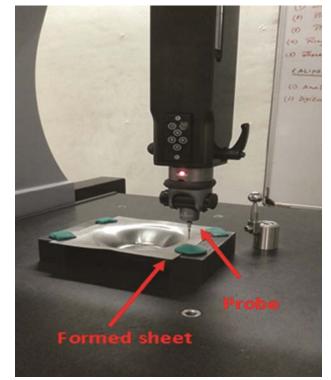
Image of the CMM while measuring the sheet formed using MPIF.
